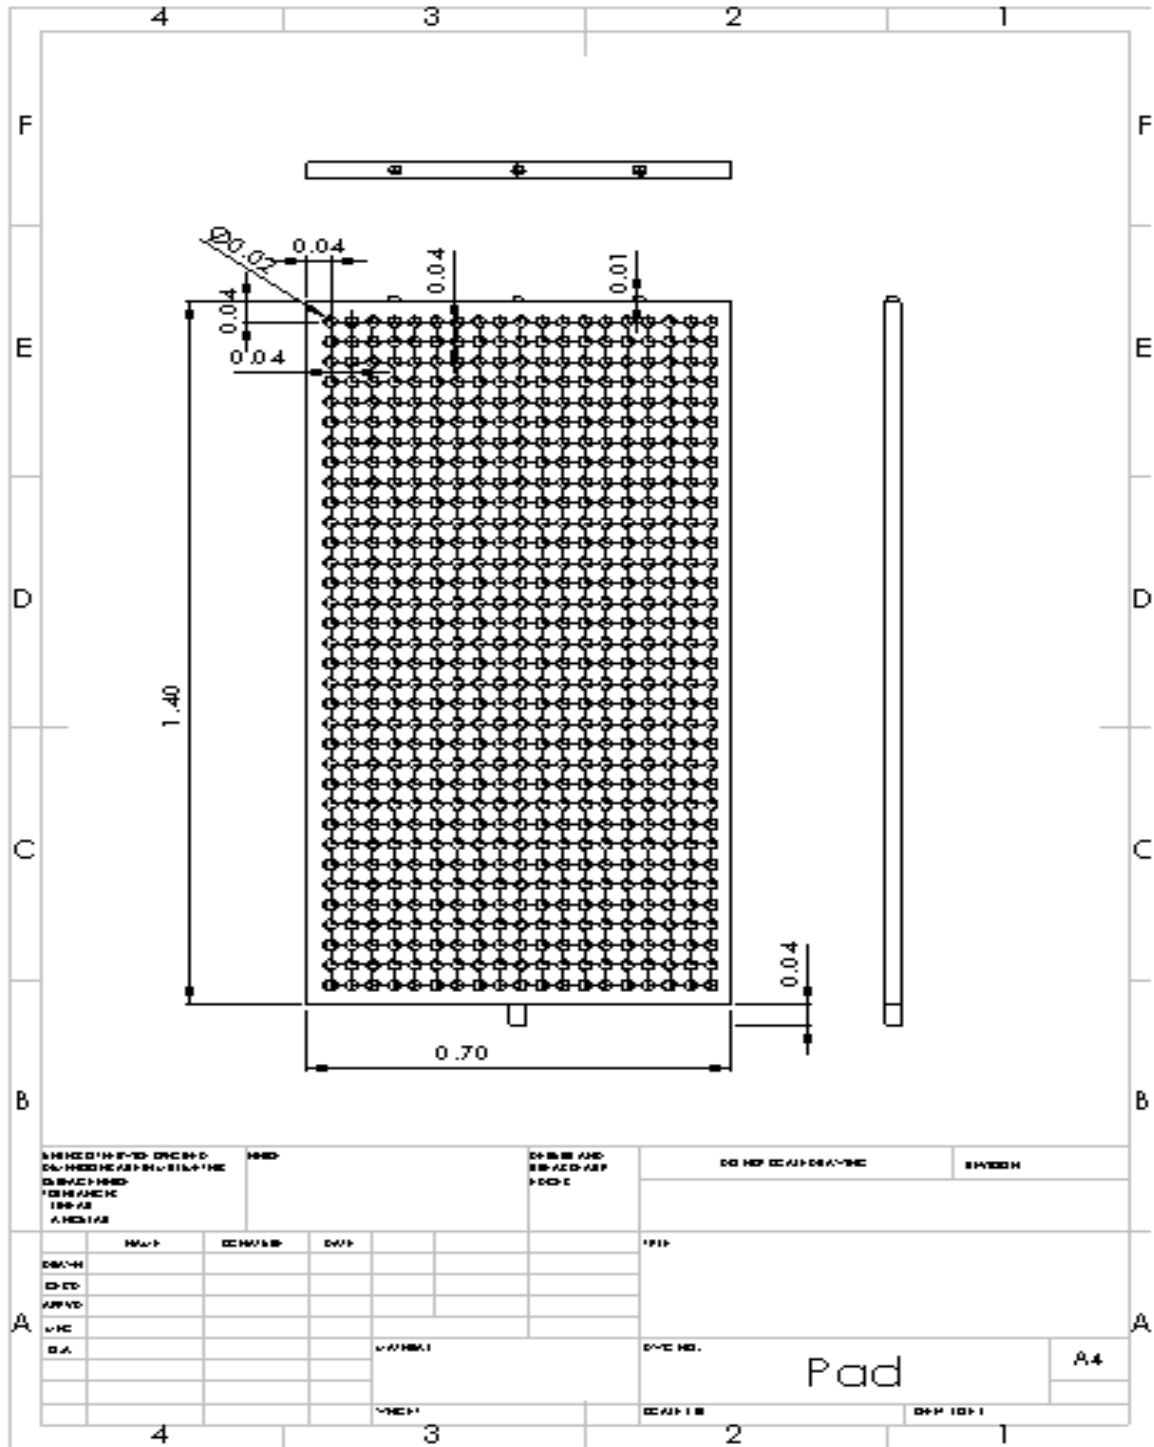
Manufacturing drawing for evaporative cooling pad
